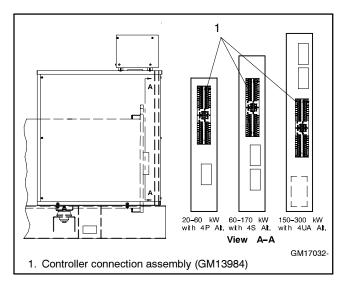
Controller Connection Assembly Mounting Locations in Junction Box (20–300 kW)
